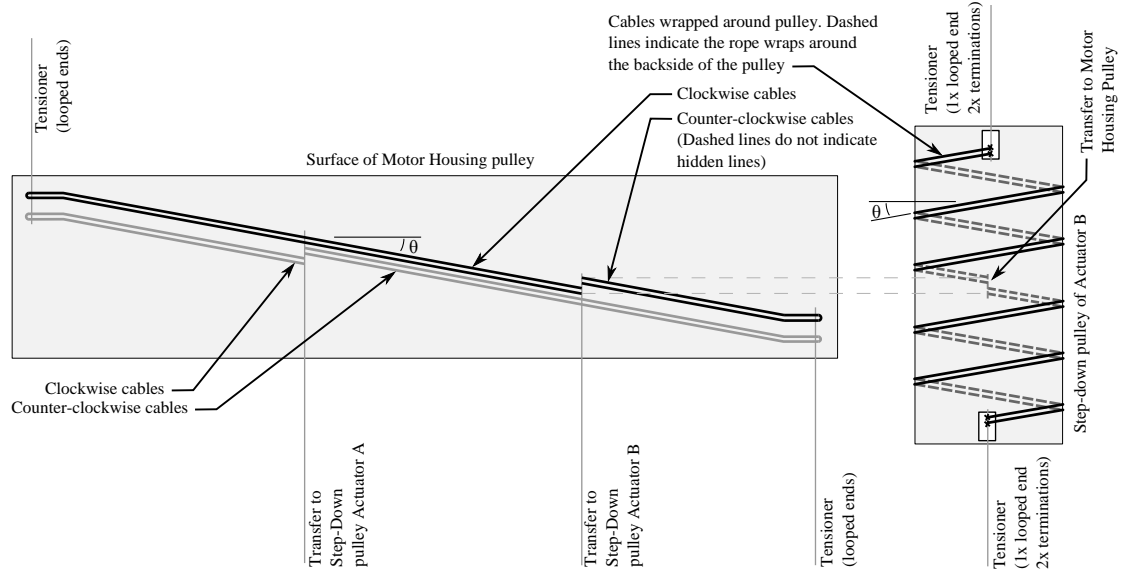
Flat pattern schematic of the second stage pulleys of both Compound Epicyclic Cable Drive transmissions. Note that the cable pitch, θ , is constant between mating pulleys, despite their difference in diameters.
